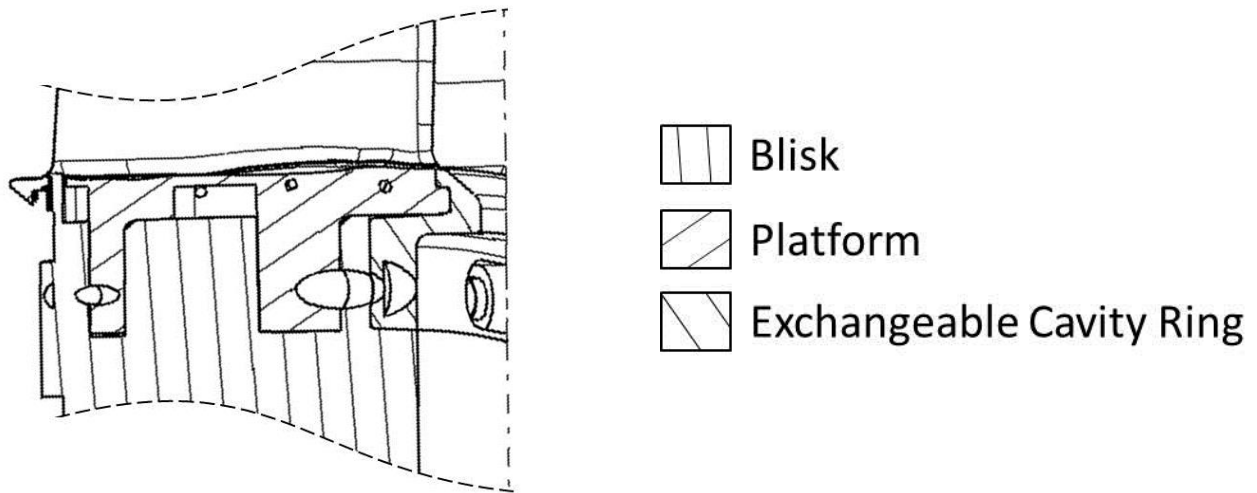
an axial cut of the rotor assembly. The heat transfer platform is bolted to the aluminum blisk. Additional containment in the radial direction is provided by the exchangeable ring defining the geometry of the rim seal cavity on the rotor side.
